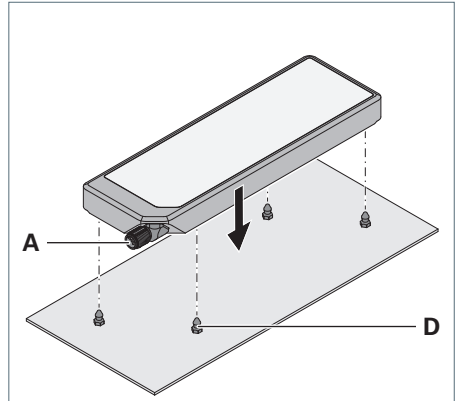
APA – Plug-in connection on the front side of the machine wall.
